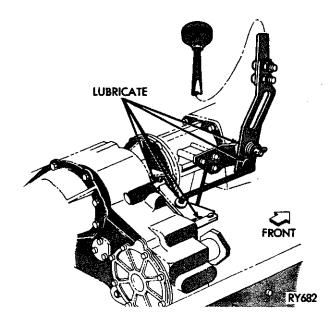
Gearshift Mechanism Lubrication (NP205 Transfer Case)
